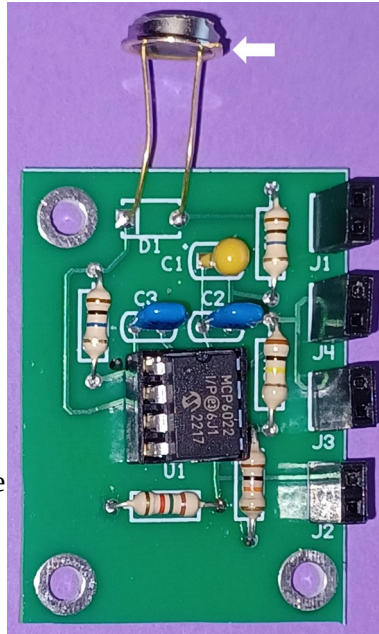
Photo of assembled PCB. The arrow shows the tab on the photodiode.
